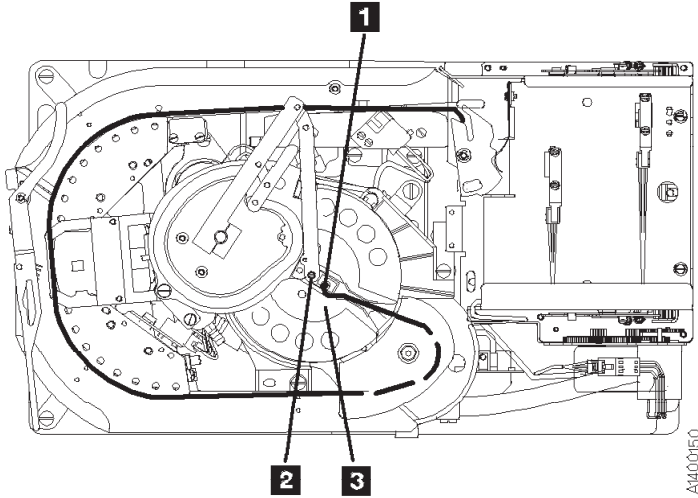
Example of Leader Block and Threader Pin in Machine Reel Hub
